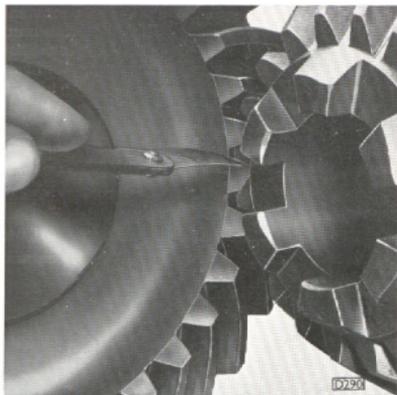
Method of measuring bevel wheel and pinion backlash.
